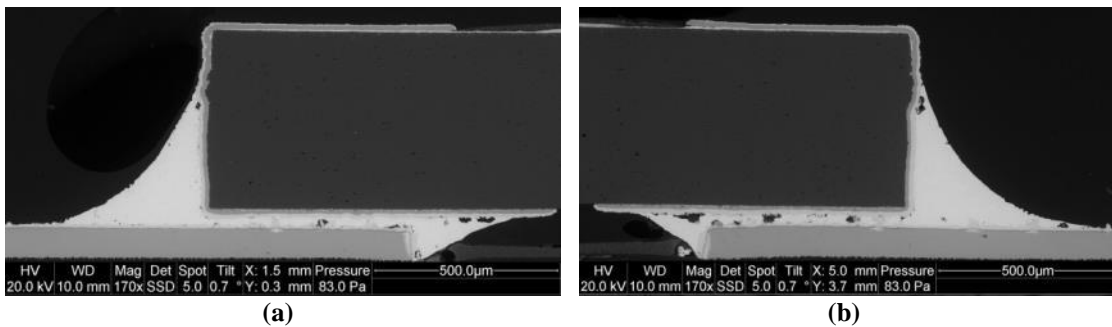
R2512 – SAC305+0.13%Ce (a) Left Solder Joint (b) Right Solder Joint after 1000 hours/200°C Aging
